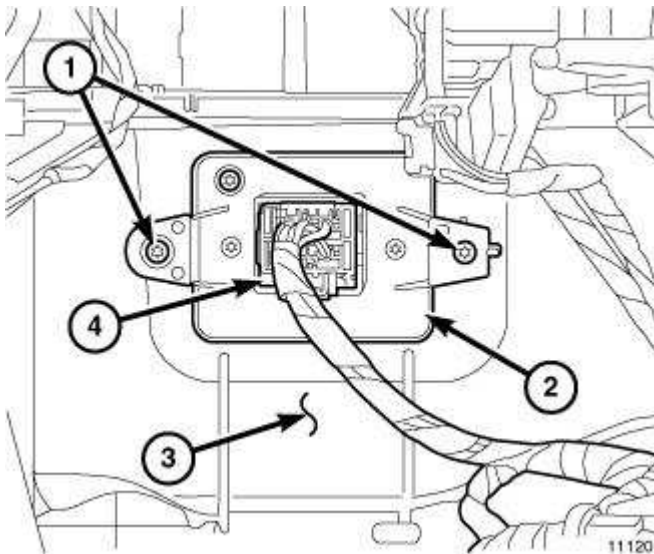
Identifying Screws, Blower Motor Resistor, HVAC Housing & Wire Harness Connector
